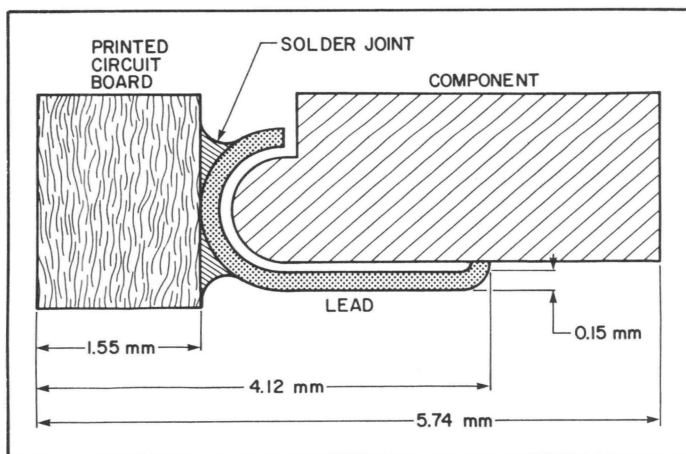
Cross-sectional geometry and characteristic dimensions of the printed circuit board, the lead, the component, and the solder.
